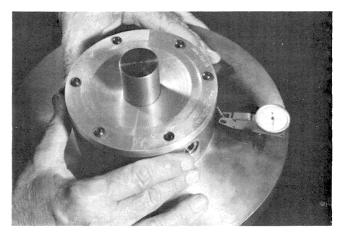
Checking the Clearance in a Tilting Pad Journal Bearing Assembly.
